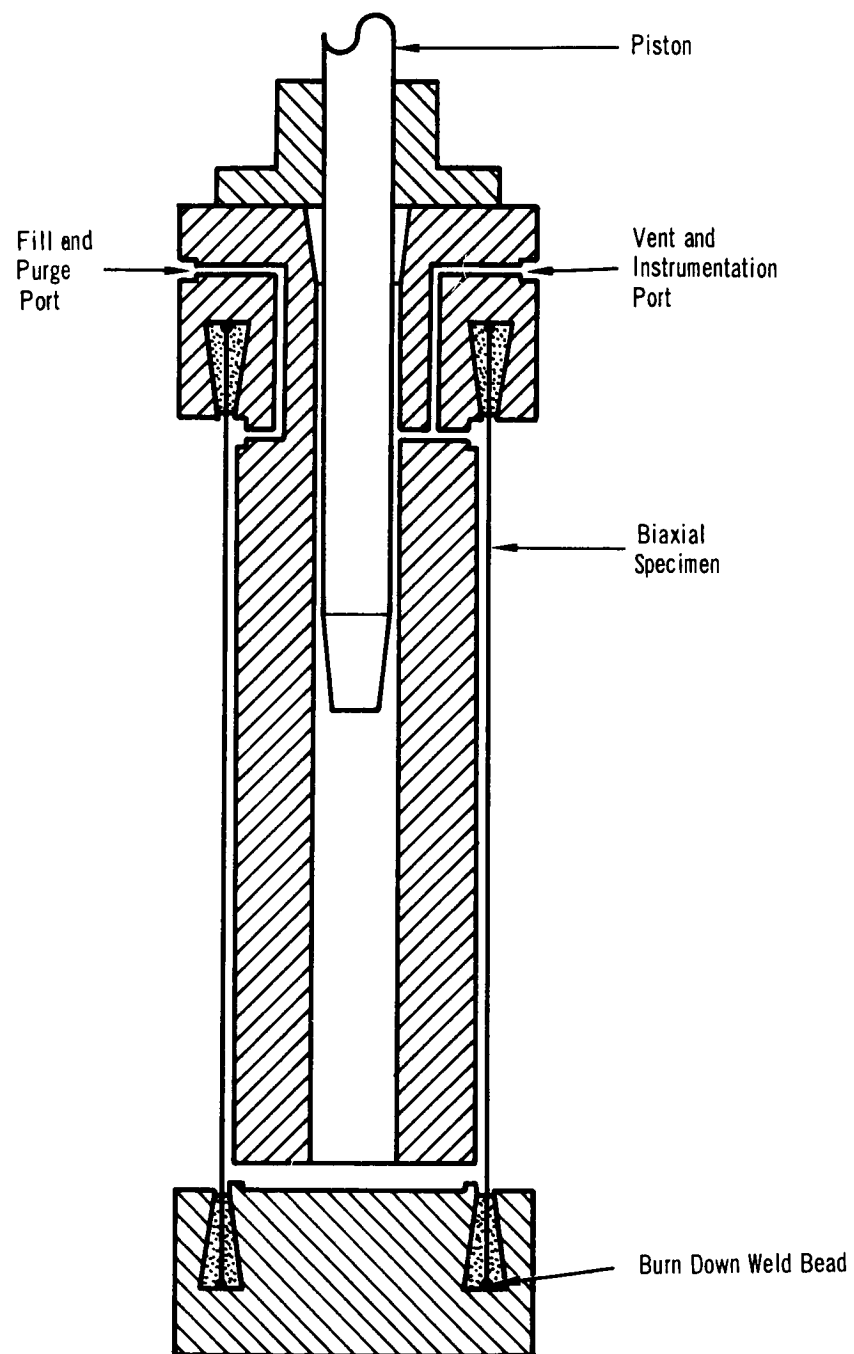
Assembled Cryogenic Biaxial Specimen
